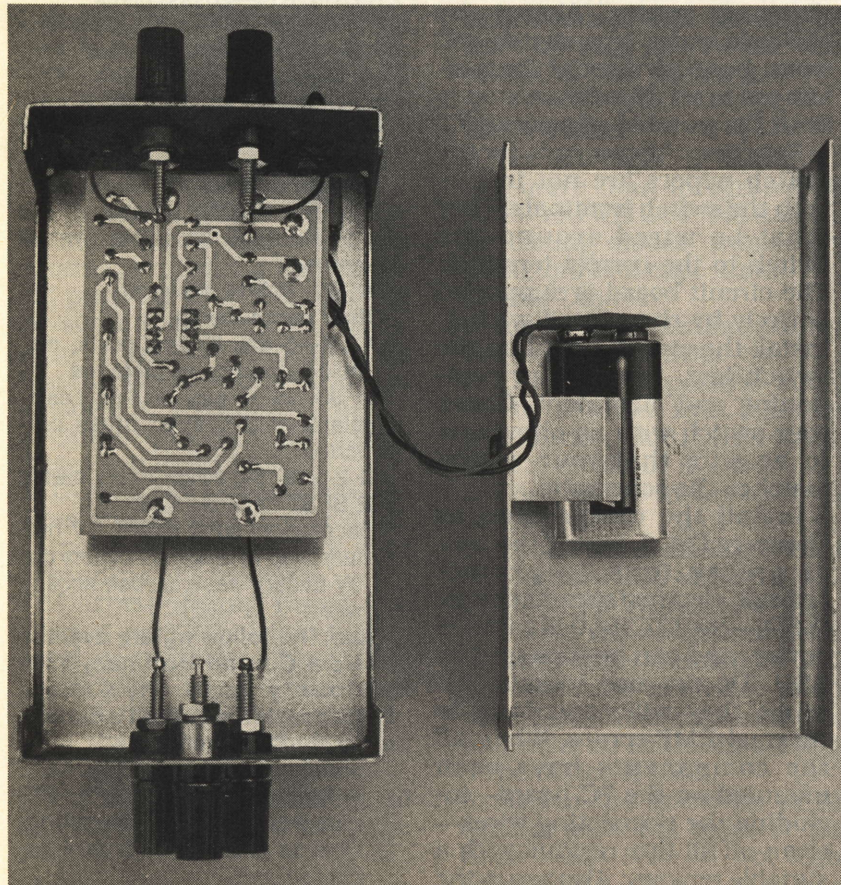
ASSEMBLED CIRCUIT BOARD is mounted in its case.
